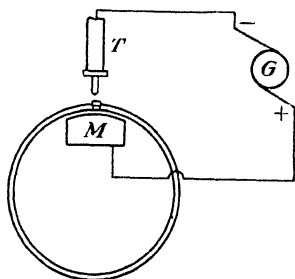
XV.—Sketch showing the method of automatic carbon arc welding. (From *Iron Age*.)
